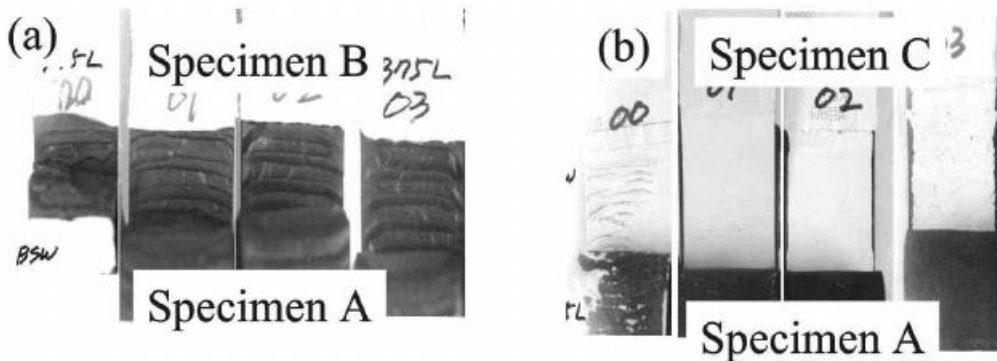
Fracture surface morphology for specimen-A/B and A/C system.
